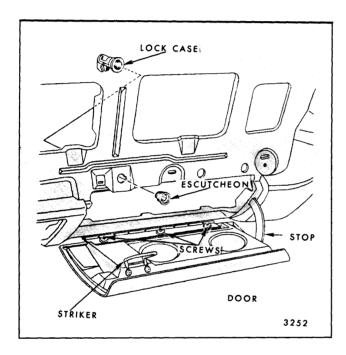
Instrument Panel Compartment Door - Buick "A & E" Styles
